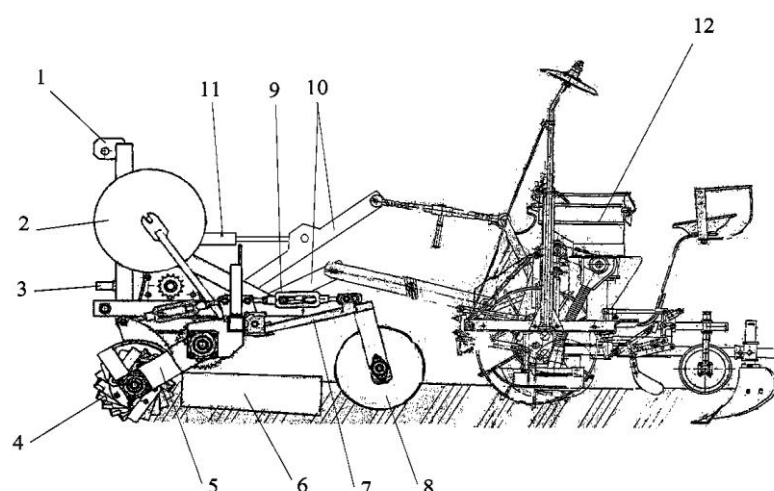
Planting tool strip milling, completely placing a drip irrigation pipe and planting a possible combined aggregate:
